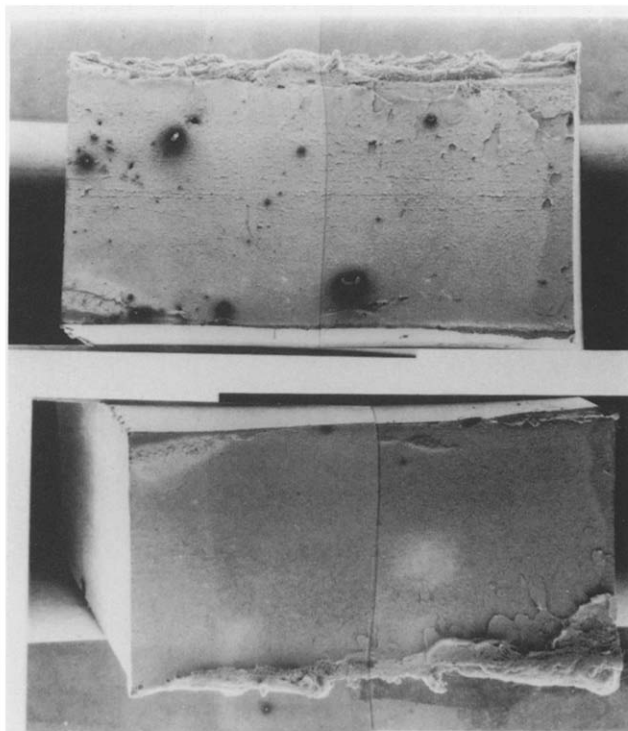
Fracture surface of a 120 Hz PC-PBT-X weld, welded at  $p_0 = 0.82 \text{ MPa}$  and  $a = 1.65 \text{ mm}$  to  $\eta_F = 0.18 \text{ mm}$ , tested at room temperature at  $\dot{\epsilon} = 0.25 \times 10^{-2} \text{ s}^{-1}$
